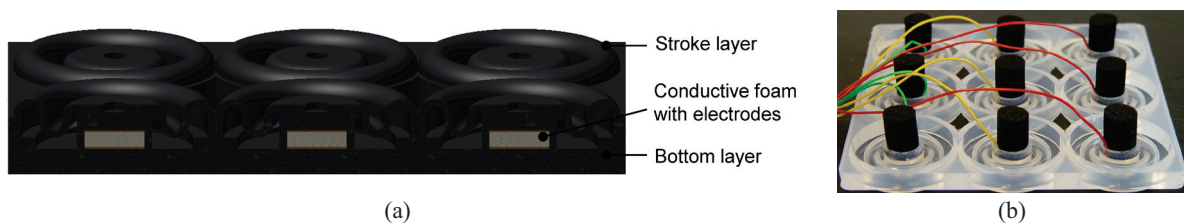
Assembly of the support system demonstrator with integrated sensor technology - (a) CAD-Modell and (b) manufactured stroke layer with the conductive foam blocks
